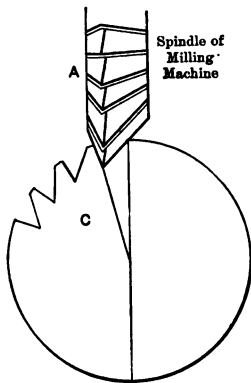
Cutter for Fluting Spiral Teeth Milling Cutters
